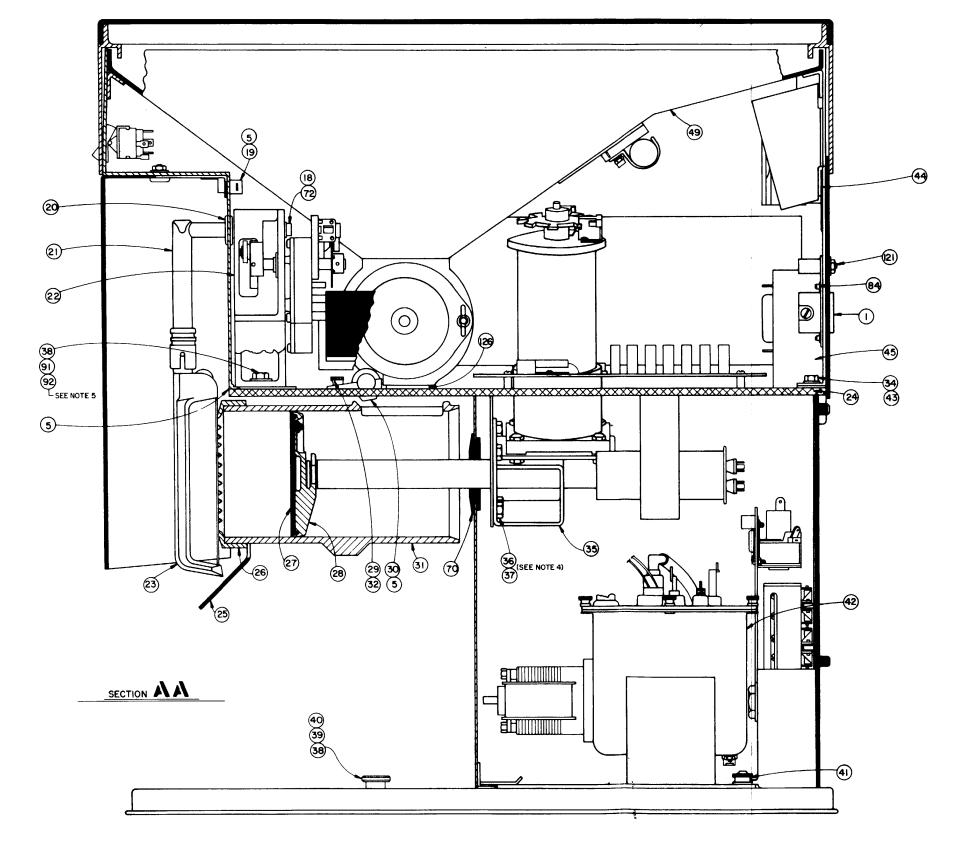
C MODEL 550GT ASSEMBLY DRAWING
